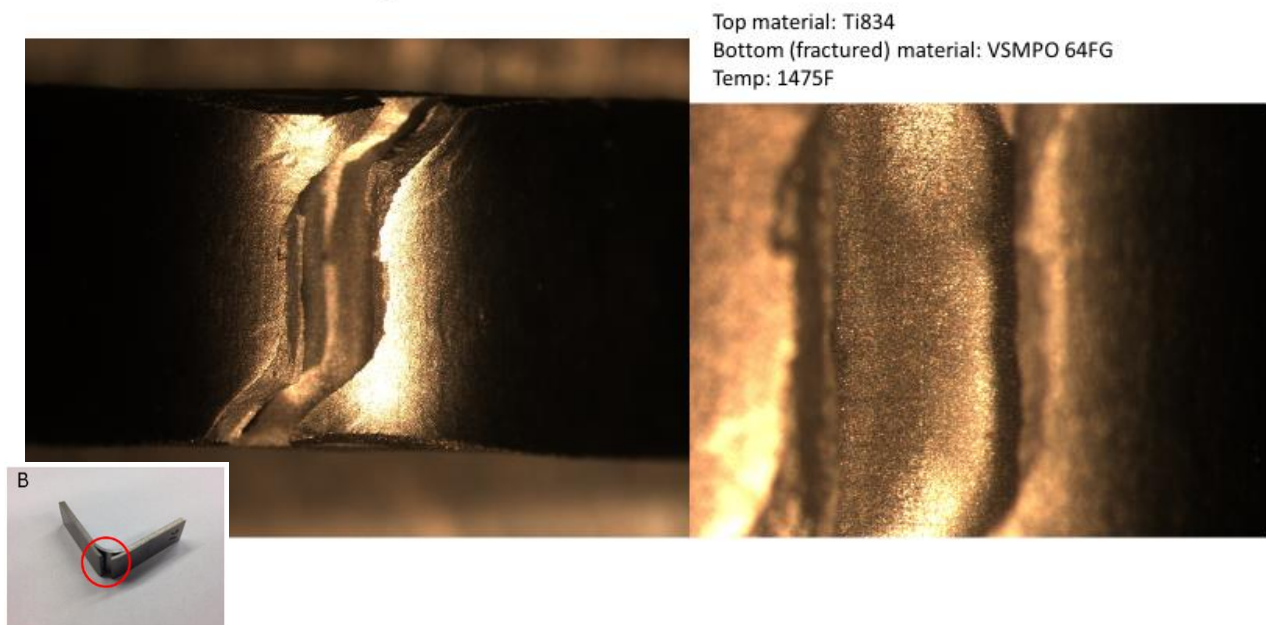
Fracture specimen with single sheet fracture. This however has significant shear lip zones.
